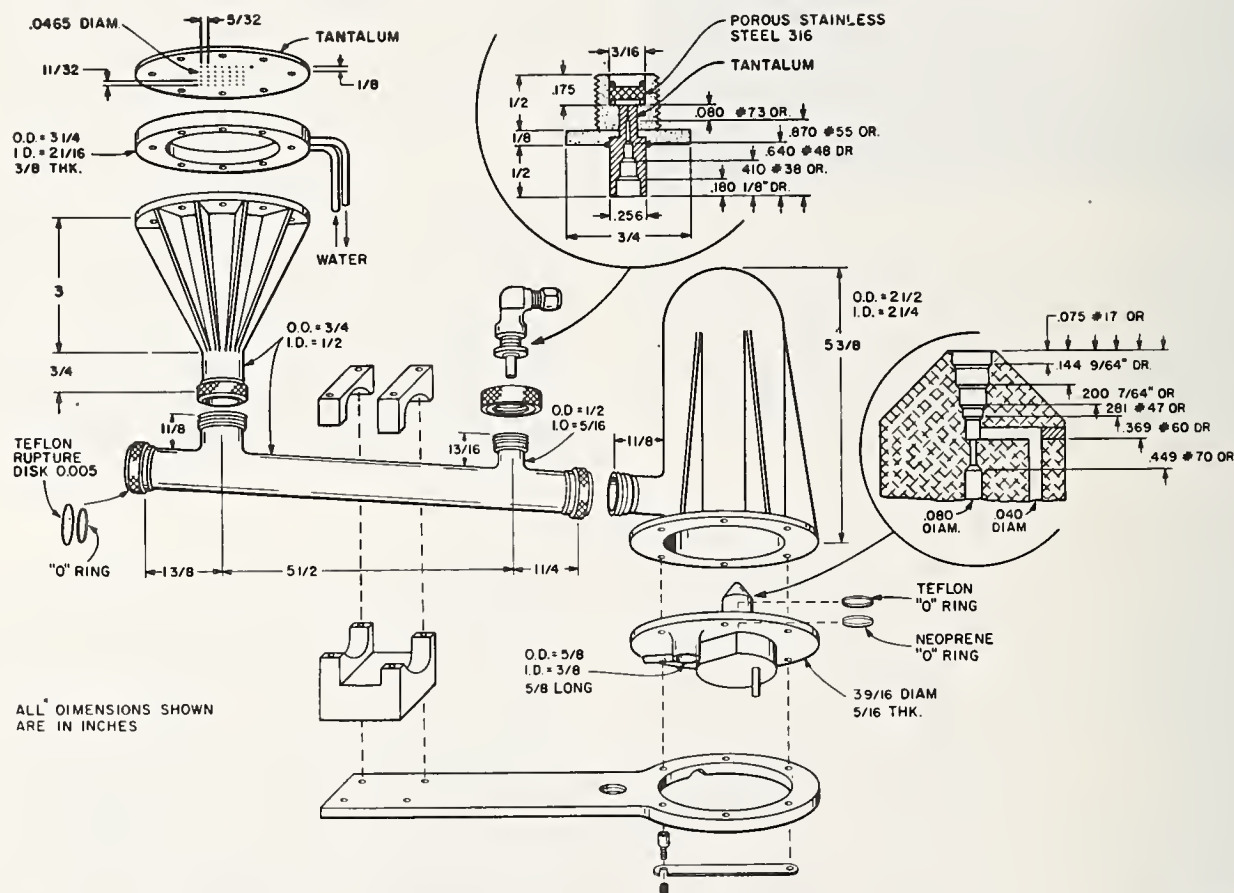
Isometric drawing of the sprayer and burner unit shown in figure 10 (10). Courtesy Plenum Press.
